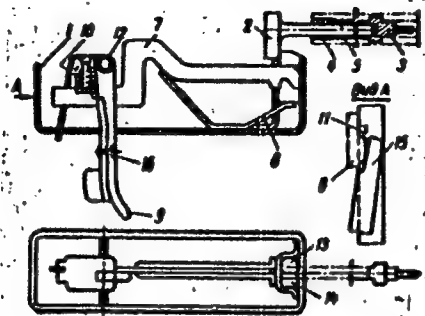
1- receiver; 2- firing pin; 3- hammer; 4- firing pin cover; 5- firing pin spring; 6- trigger lever; 7- trigger lever protrusion; 8- strip spring; 9- trigger hook; 10- spiral spring; 11- trigger hook slot; 12- trigger hook pin; 13- sear; 14- automatic sear; 15- fire control lever; 16- fire control lever pin
